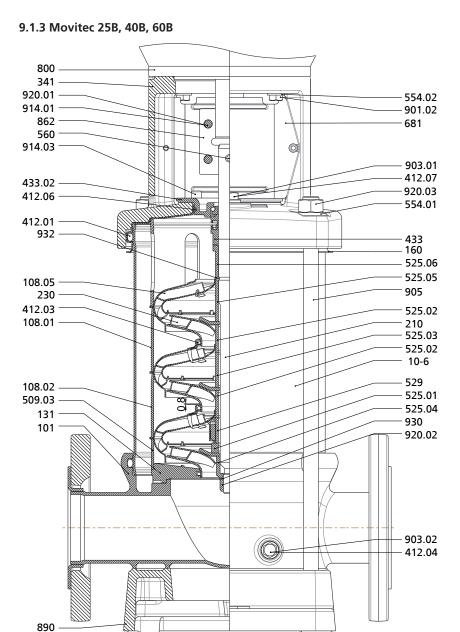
General assembly drawing of Movitec 25B, 40B, 60B
